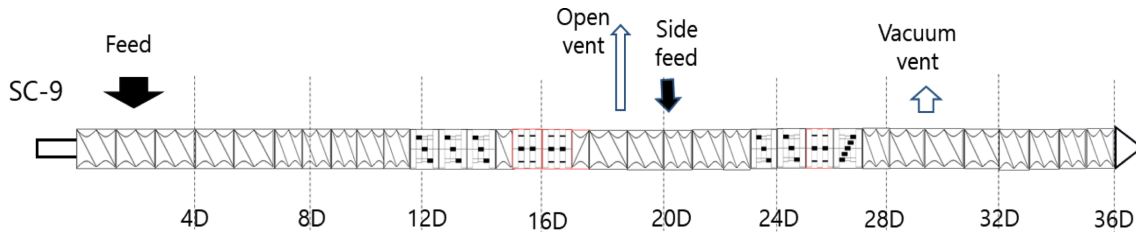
Screw configuration of an intermeshing co-rotating twin screw extruder with a large screw diameter.
